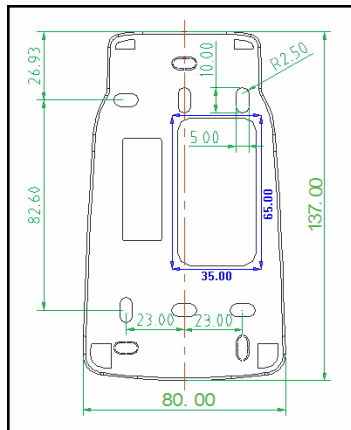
Diagram of the Hole Locations in the Mounting Plate
